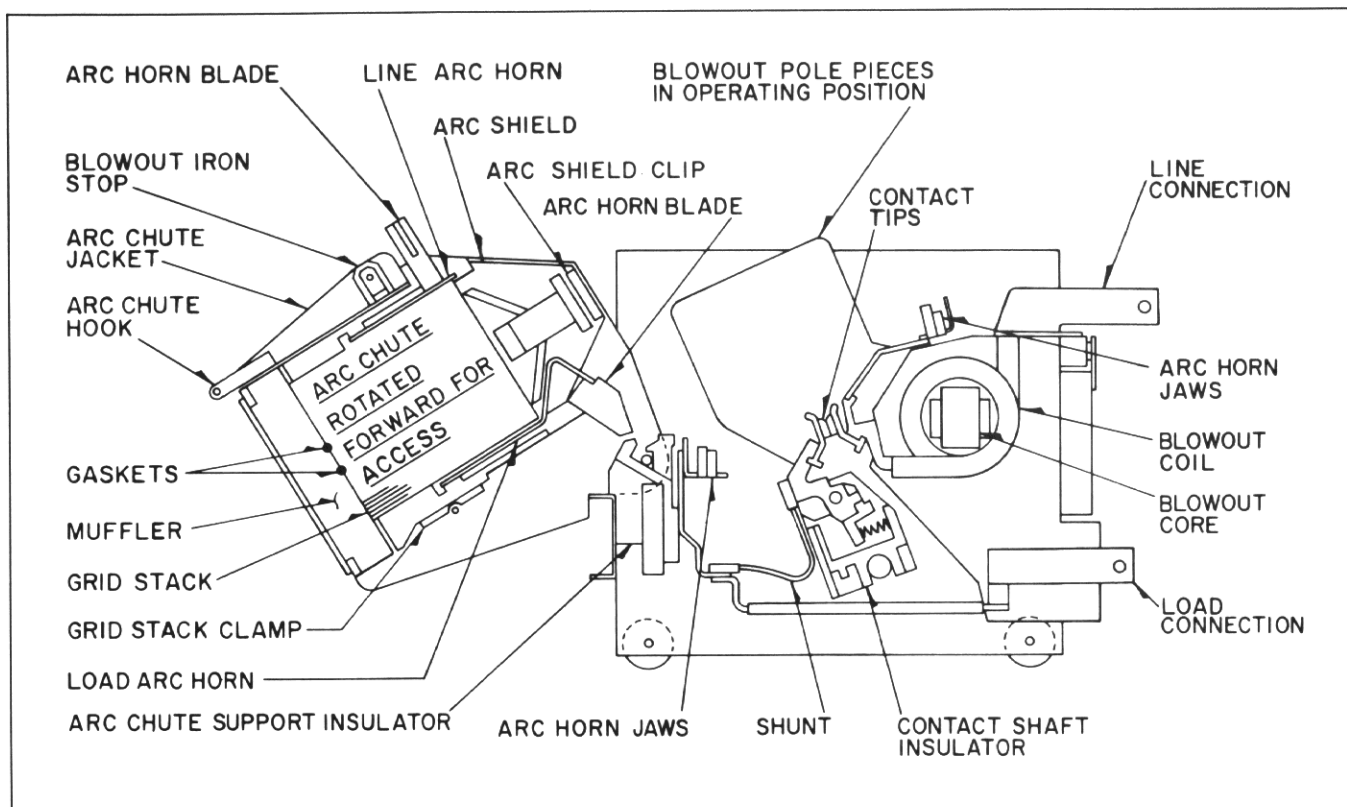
Sectional View Through Contacts (Dwg. 3513C87)
